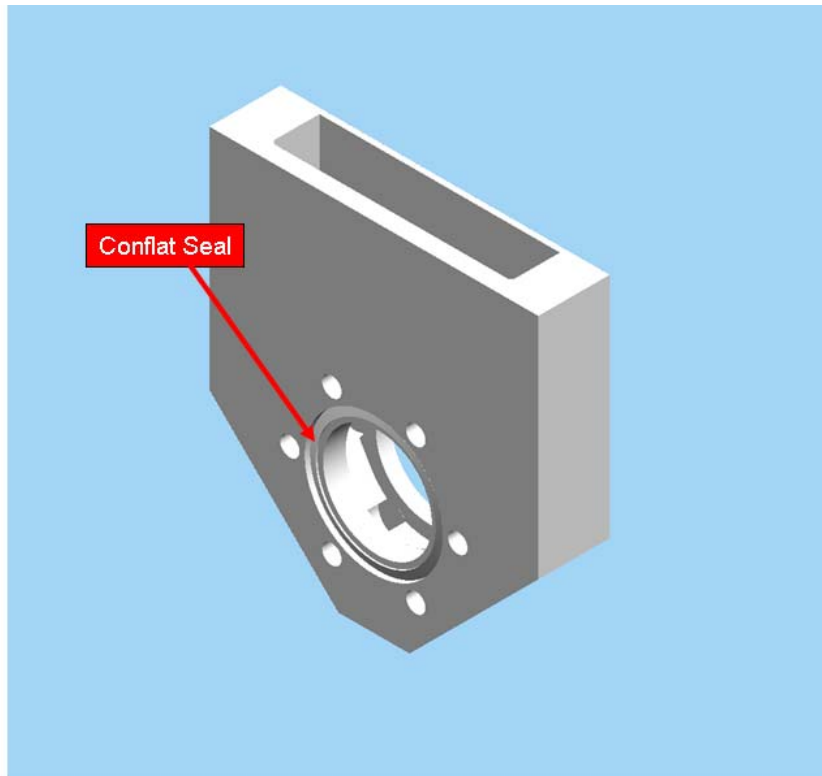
Conceptual design, receptacle part of a custom valve separating the two parts of the vacuum enclosure.
